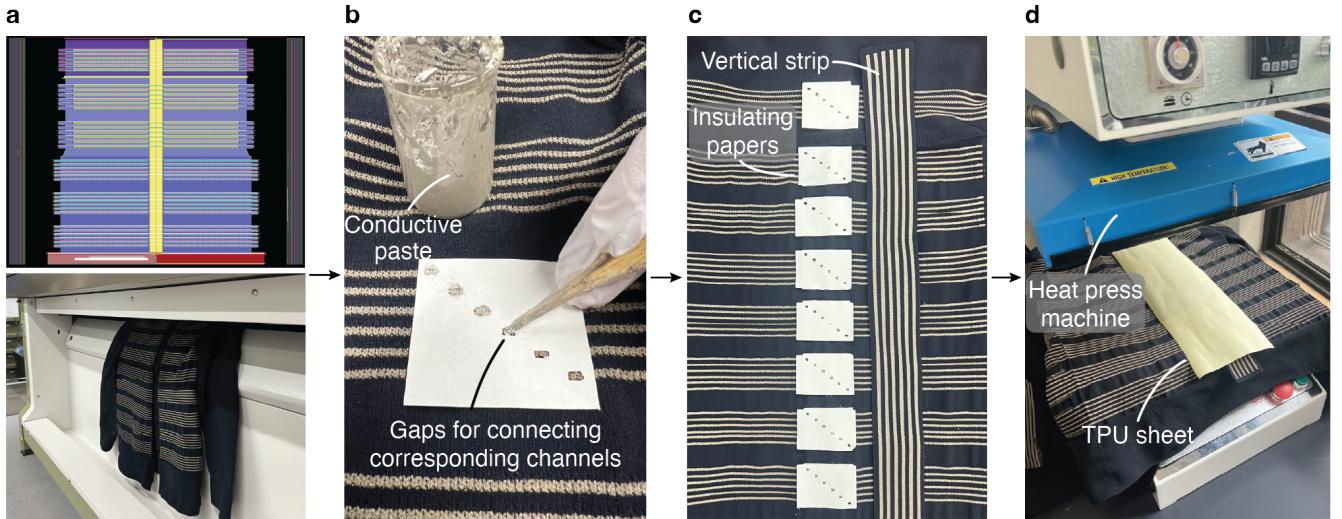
Fabrication process of the textile including (a) designing the thread pattern and producing with industrial knitting machine (MACH2XS, SHIMA SEIKI MFG., LTD.), (b) covering irrelevant channels' conductive threads with square pieces of paper to ensure insulation and coat corresponding channels with conductive paste to enhance conductivity, (c) aligning the gaps in each channel with the corresponding channels of a vertical conductive strip, (d) affixing the strip using Thermoplastic Polyurethanes (TPU) under a heat press machine at 0.7 MPa and 120 °C.
